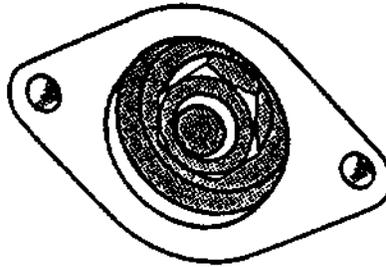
Fuel Injection Pump Gear Access (Cover Removed)
